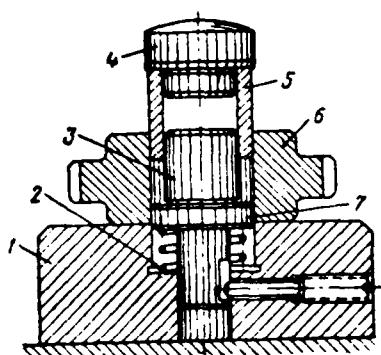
Device for press fitting of bushings: 1 - base/root; 2 - spring; 3 - mount/mandrel; 4 - insert/bushing; 5 - bushing; 6 - gear; 7 - plunger.
